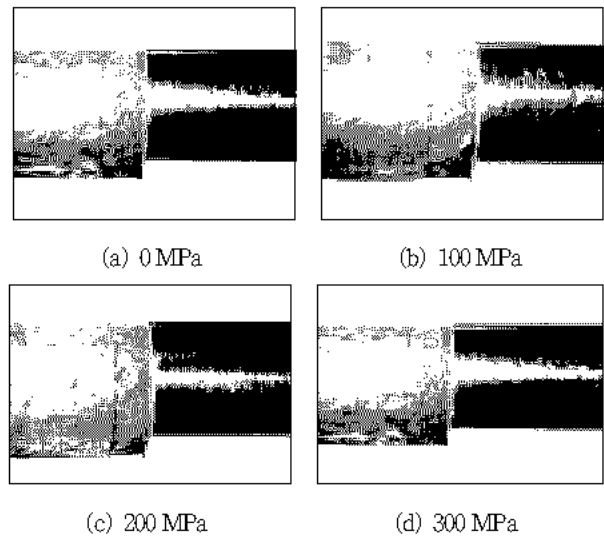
Corrosion pattern of IN713LC-SCM440 friction welded specimens
